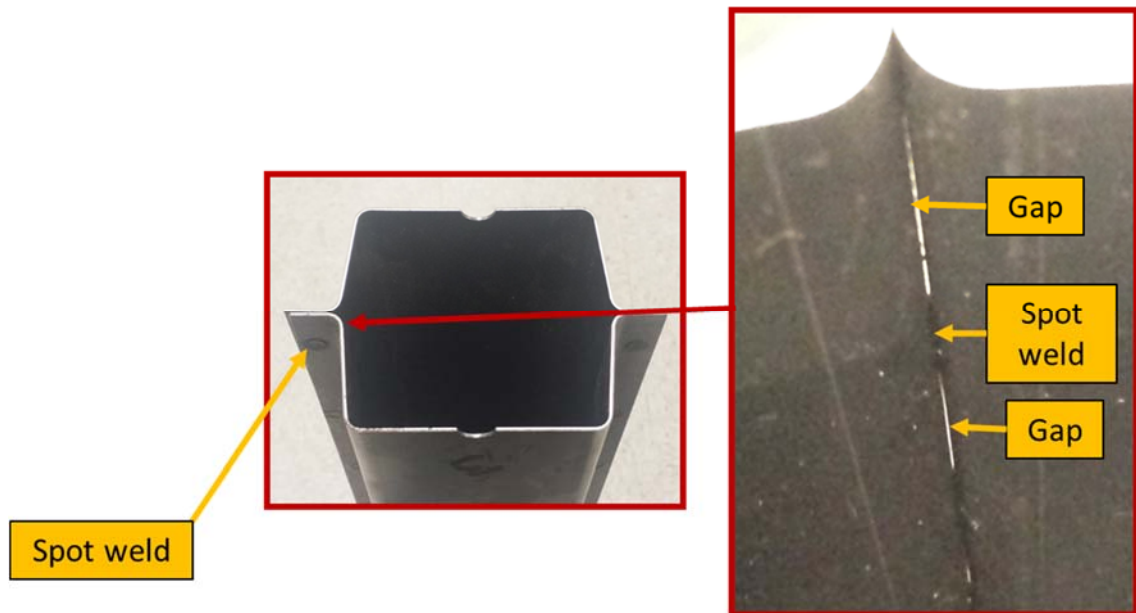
C.1: Double hat section joined using only spot welds. Photo courtesy of Dr. Scott Noll.
